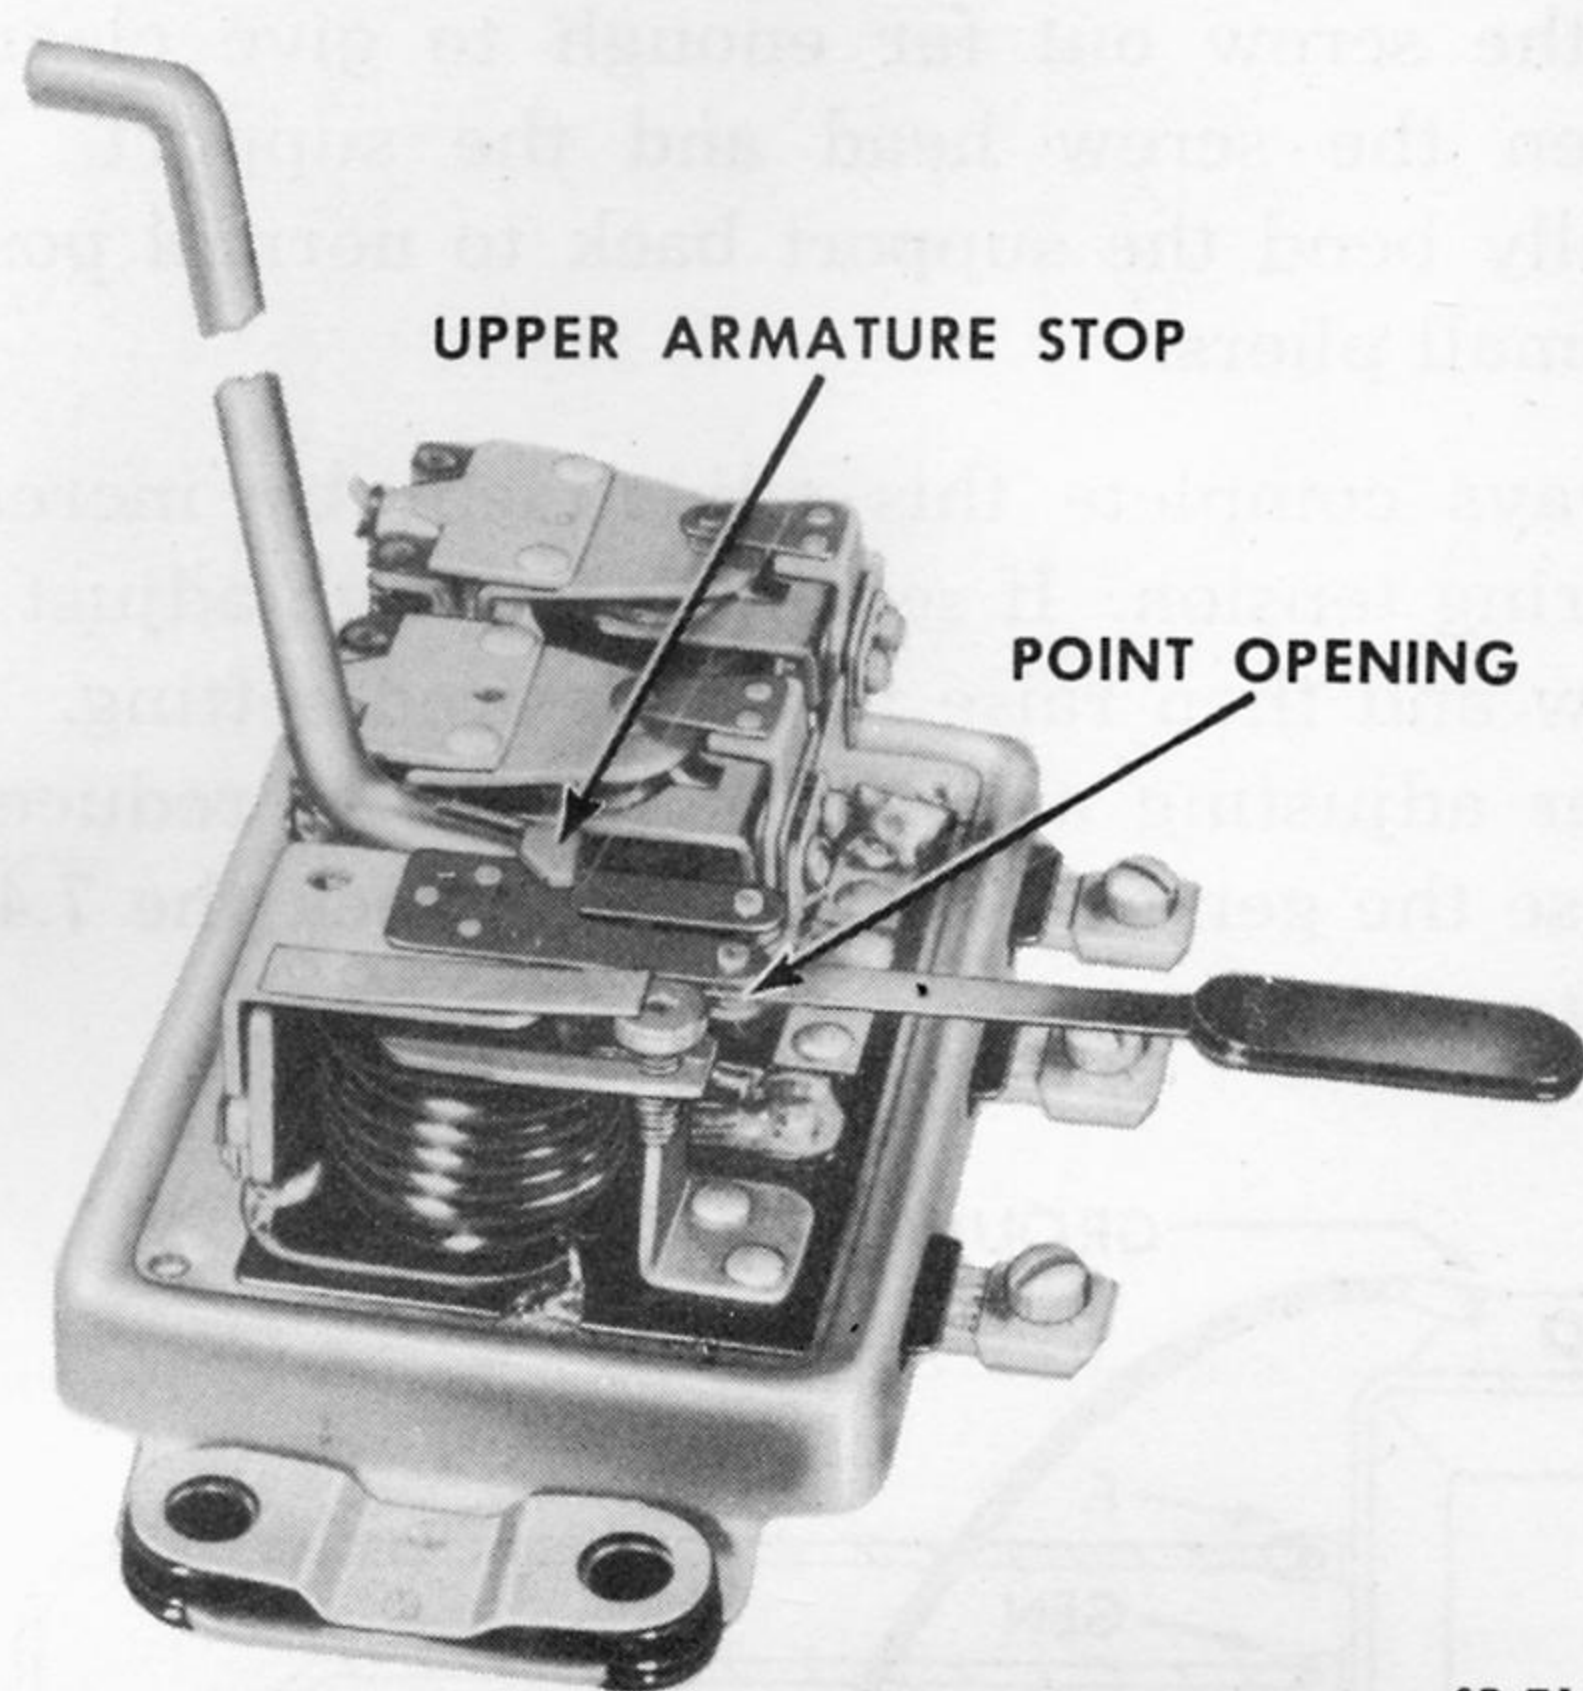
Adjusting Kaiser Cut-Out Relay Contact Point Gap
